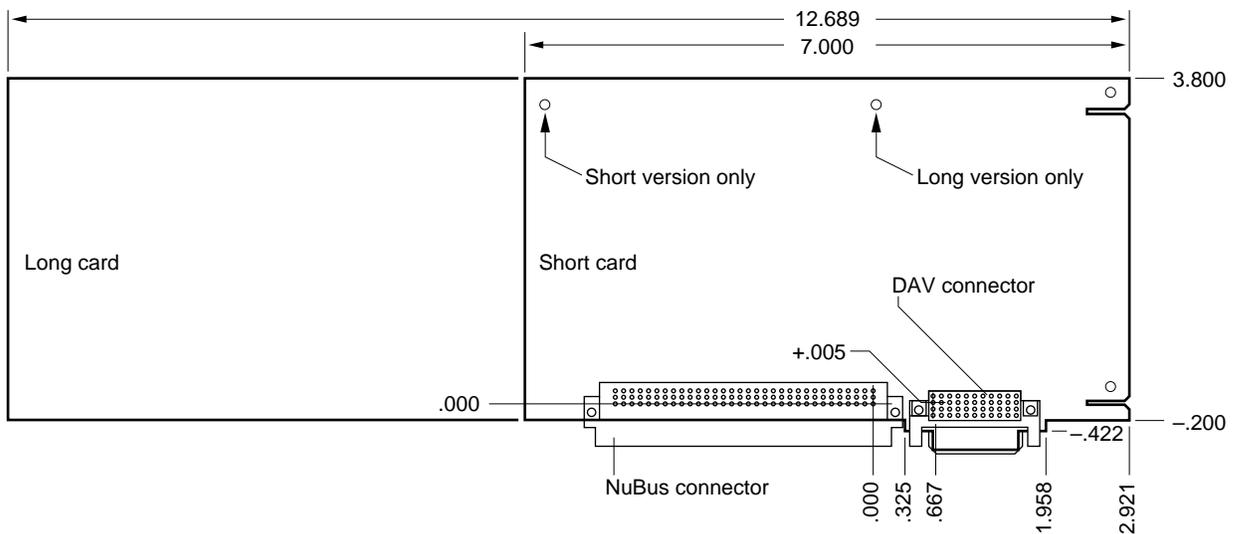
Macintosh Quadra 660AV expansion card mounting
